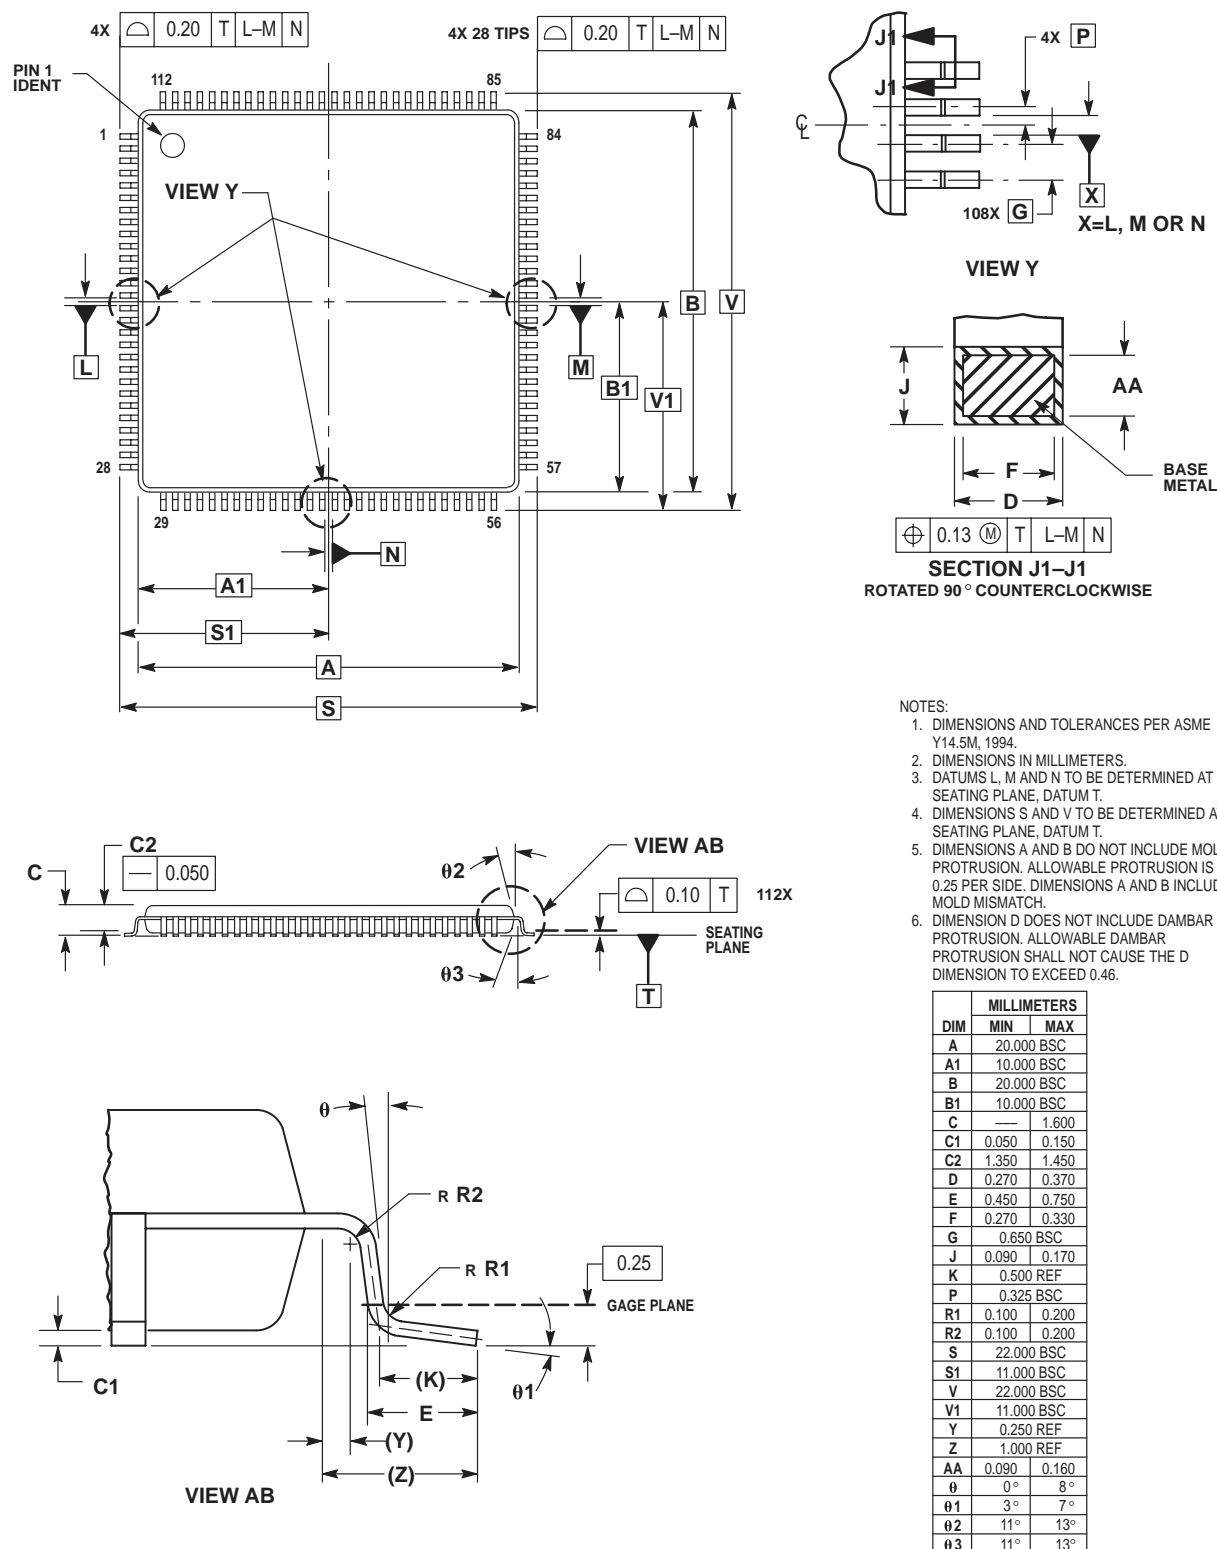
112-Pin TQFP Mechanical Dimensions
